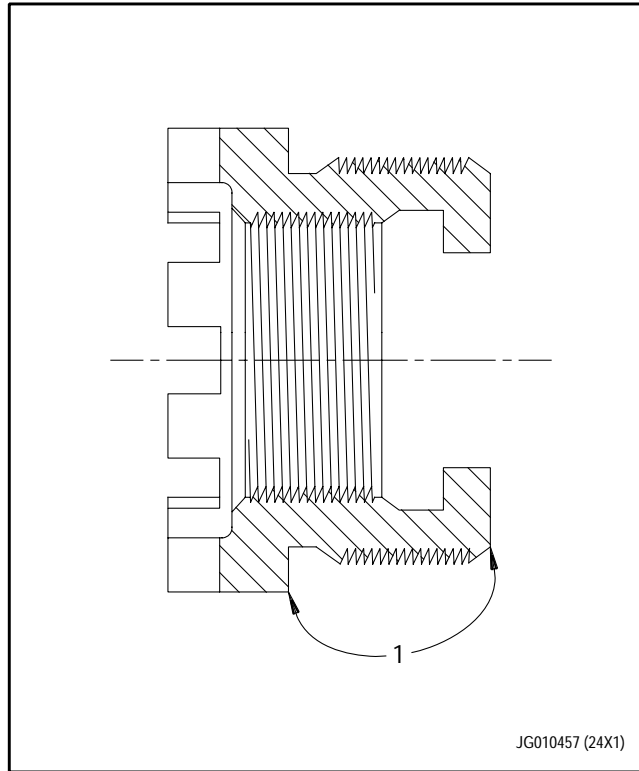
Screw Thread Insert (Igniter Plug Boss Insert) - Thread Repair
